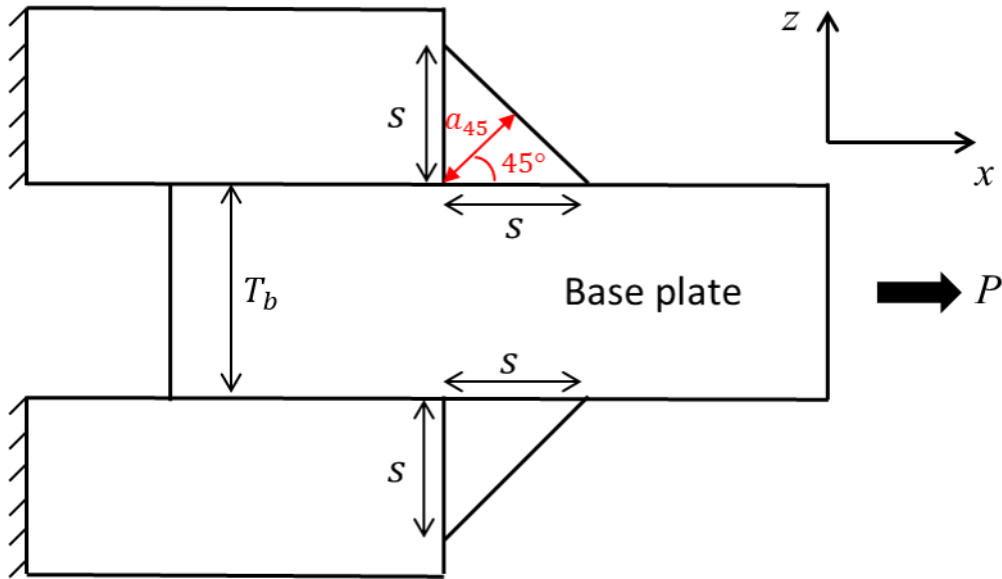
Fillet weld leg and weld throat definition in AWS B4.0
